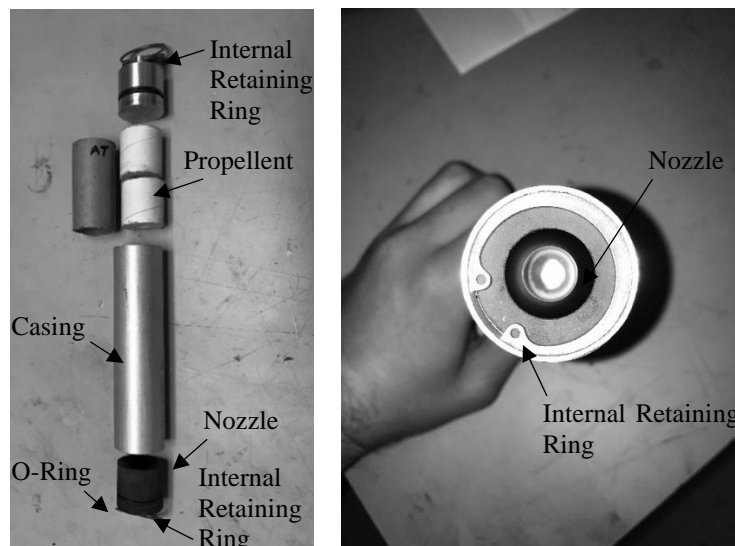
Disassembled Motor (left) and Assembled Motor (right)
